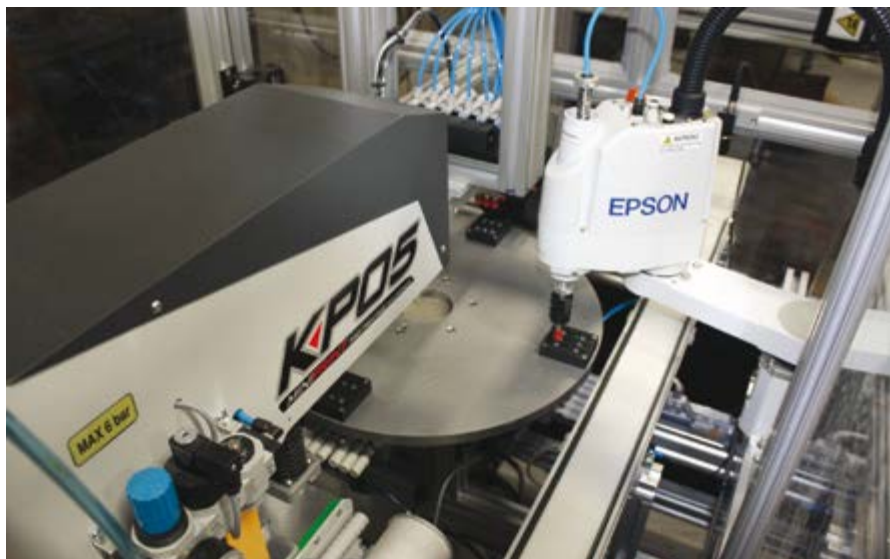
a single-colour pad printer adapted with a rotary table, robot for loading parts and inline conveyor system
